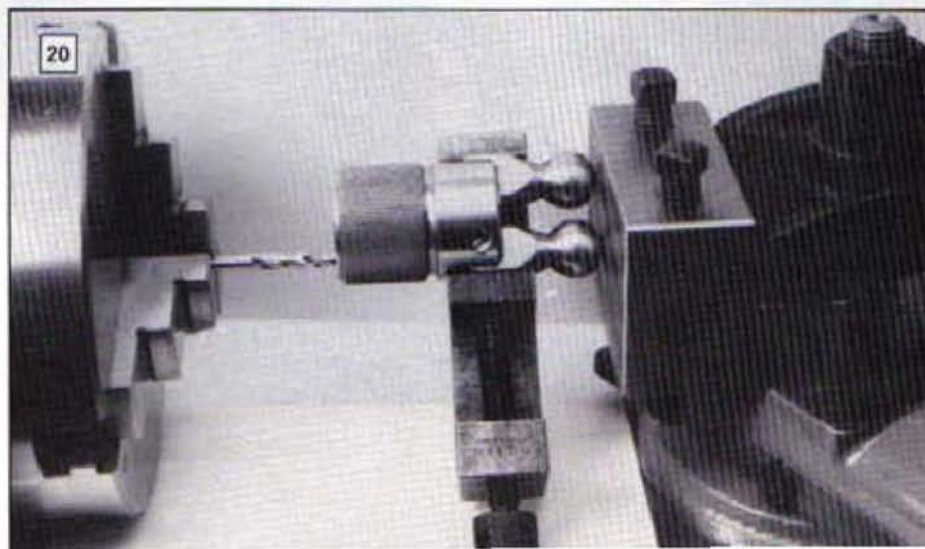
The completed item shown with its component parts in exploded form. Photo 20. Drilling the depression for the spring-loaded balls, arms closed.
